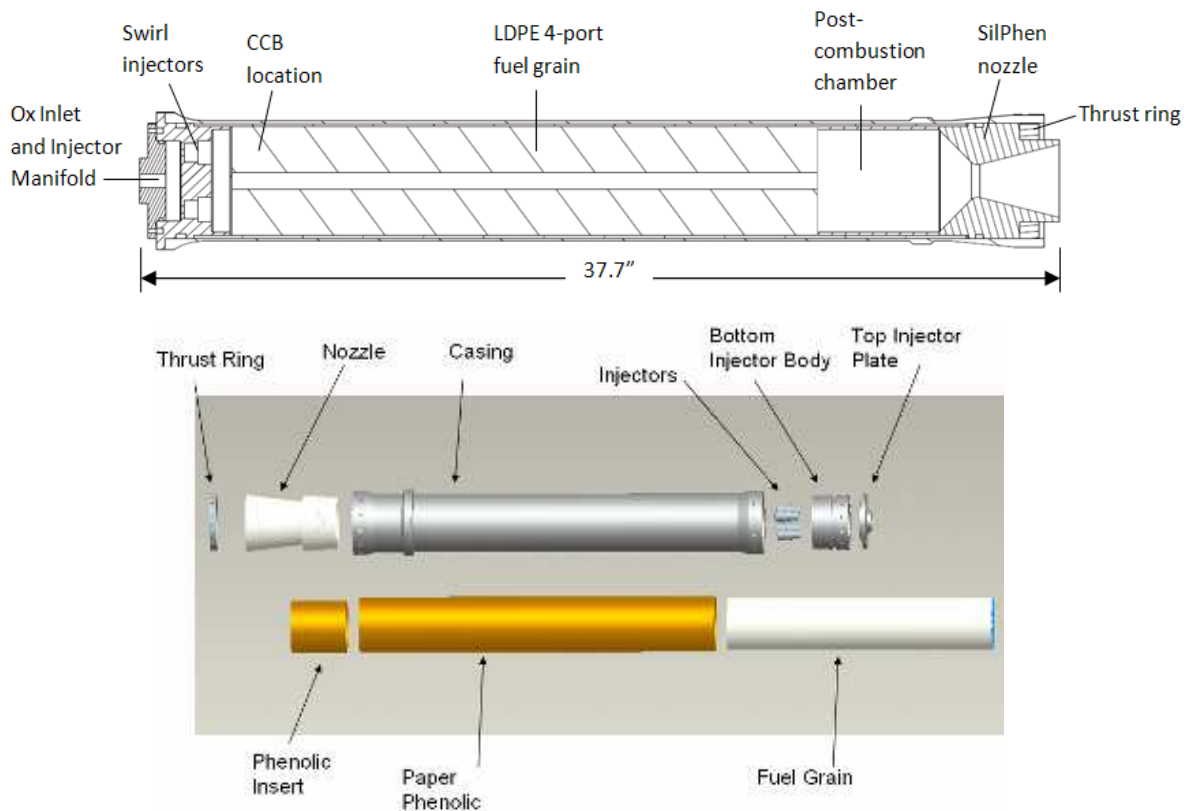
Diagram and exploded view of the 900 lbf-thrust flight-weight hybrid rocket motor.
